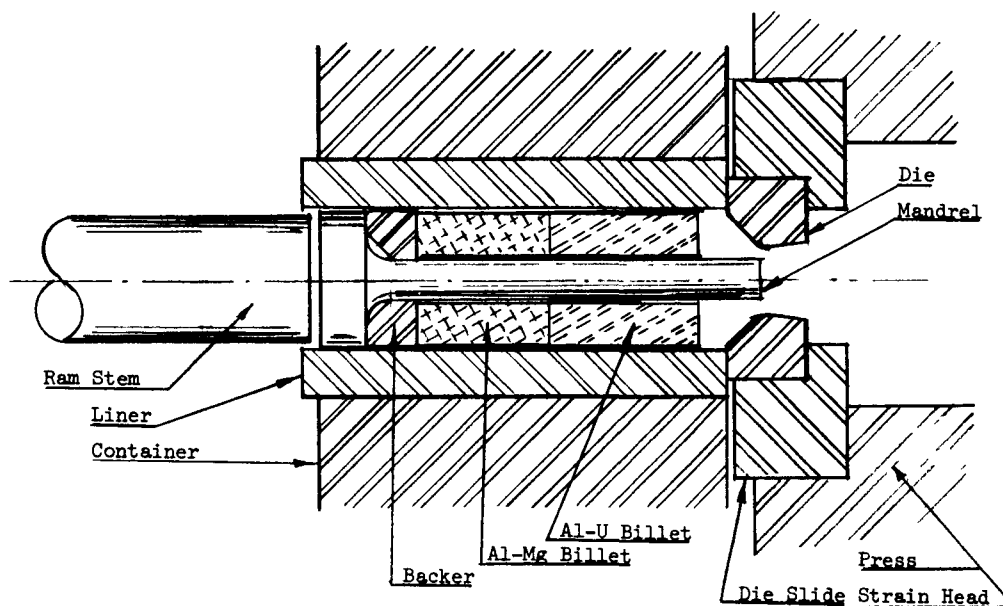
Schematic Arrangement of Primary-extrusion Billets and Tools
